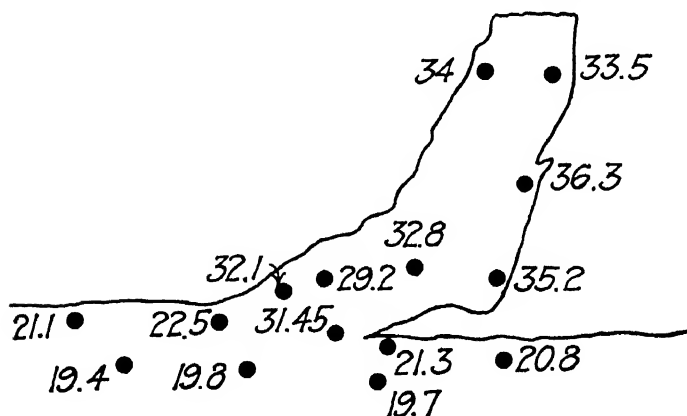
HARDNESS INDUCED BY TOOL IN STAINLESS IRON B
